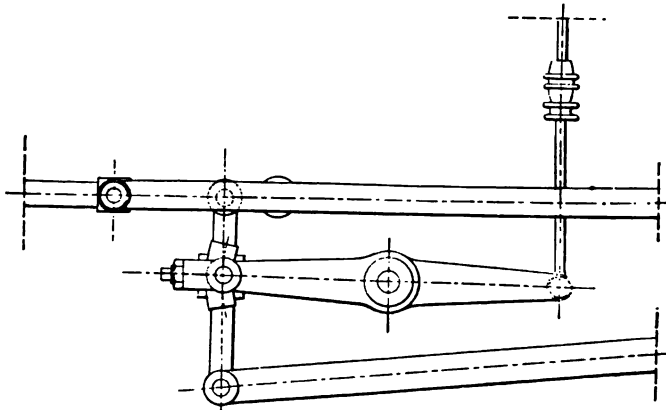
“Express” Engine: Expansion-valve Gear. Scale 1/8th.
